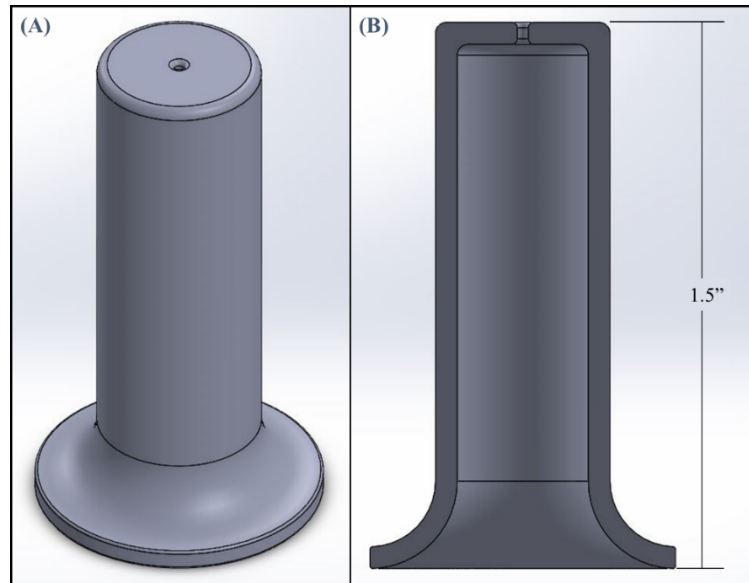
Second version of the can design that was produced. (A) isometric view, (B) section view
